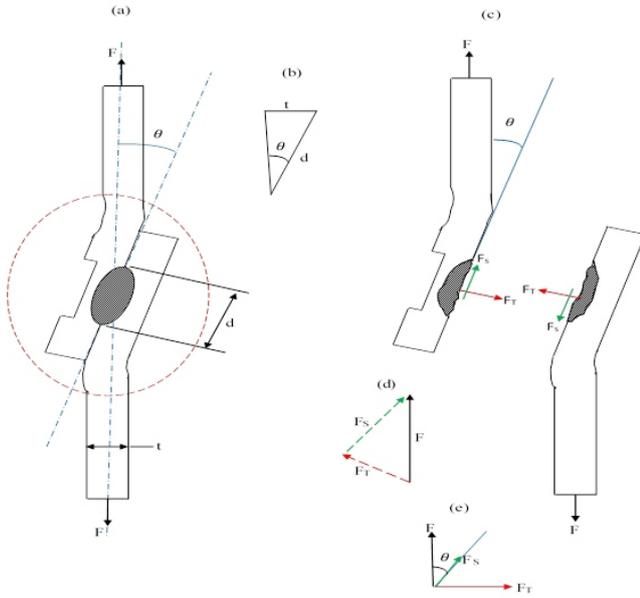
Axial loaded pinless weld (a) nugget rotation of weld; (b) angular displacement of nugget; (c) fractured specimen with stress pattern; (d) free body diagram of sheared specimen; (e) force resolution
